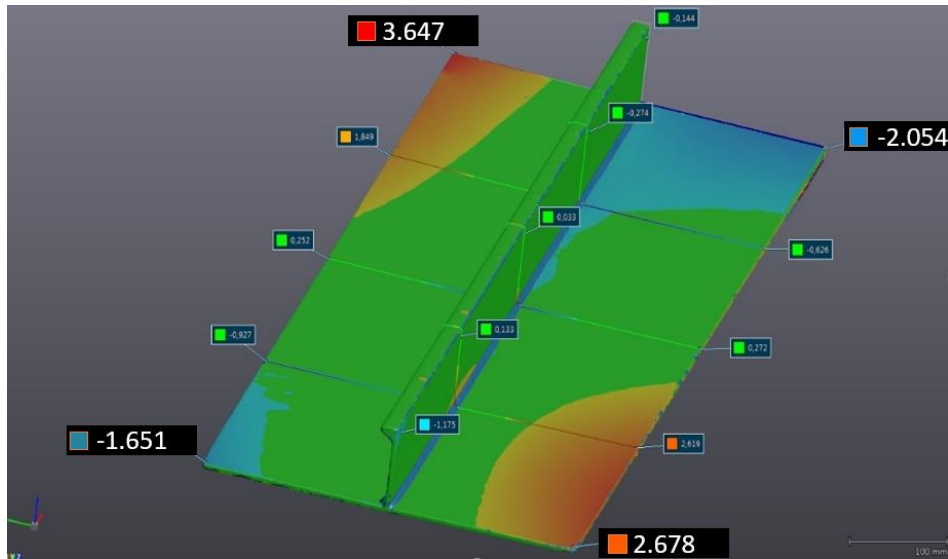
3D laser scanning of fillet welds [2] units in [mm].
